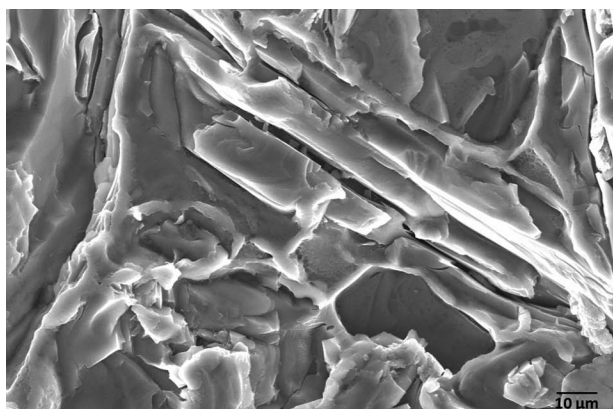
High magnified photograph of the fracture surface of A356 casting. There is no suggestion of dimples visible here. The surface, on the other hand, indicates platelets that have fractured
